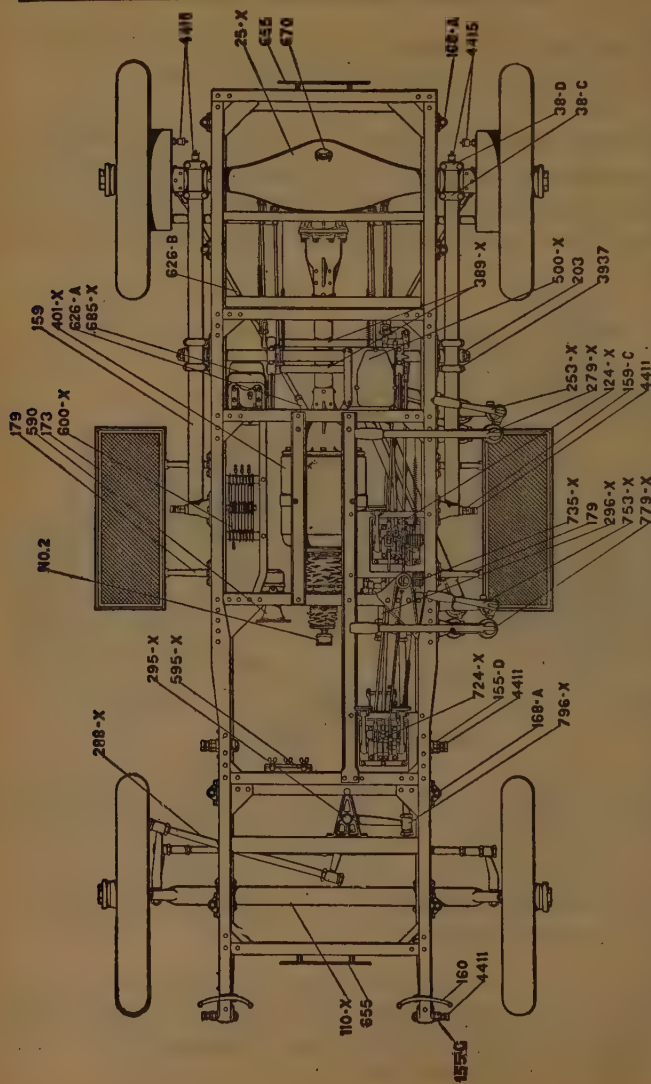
,060.—Plan view of Baker electric chassis. The parts are: 25-X, rear axle; 38-C, rear spring yoke front; 38-D, rear spring yoke rear; 110-X, front axle; 124-X, front levers, rear; 155-D, front spring bolt, front; 155-D, front spring bolt, rear; 159, rear spring; 159-C, rear spring bolt; 160, head lamp bracket; 168-A, fender bracket; 173, step pad; 179, step bracket; 203, rear spring seat, center; 253-X, rear control mast; 279-X, steering mast, rear; 288-X, lower steering rod, bell crank to spindle; 295-X, bell crank; 296-X, lower steering rod, mast to mast; 389-X, brake shaft; 401-X, motor; 500-X, horn; 590, controller; 590-X, fuse box; 600-X, resistance; 626-A, brace rod clevis; 626-B, brake rod; 655, license bracket; 670, oil inlet; 685-X, contactor; 724-X, foot levers, front; 735-X, interlock; 753-X, front control mast; 779-X, steering mast, front; 796-X, lower steering rod, mast to bell crank; 3,937, rear spring clip; 4,411, 4,415, No. 2 grease cups.
